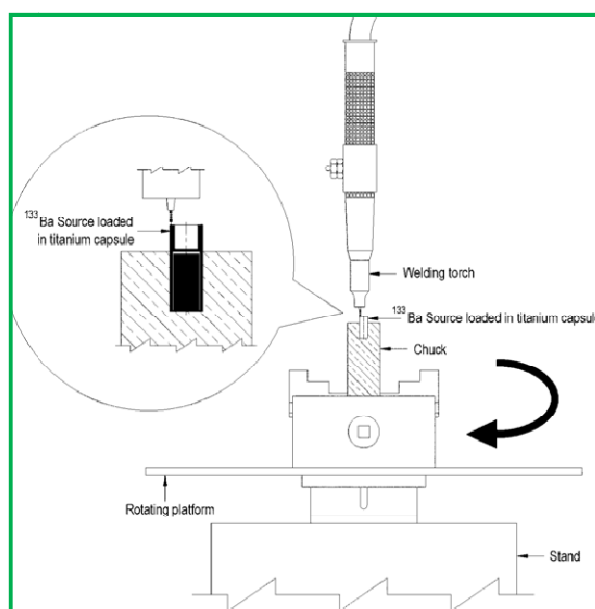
Welding set up for the encapsulation of ^{133}Ba sources.
